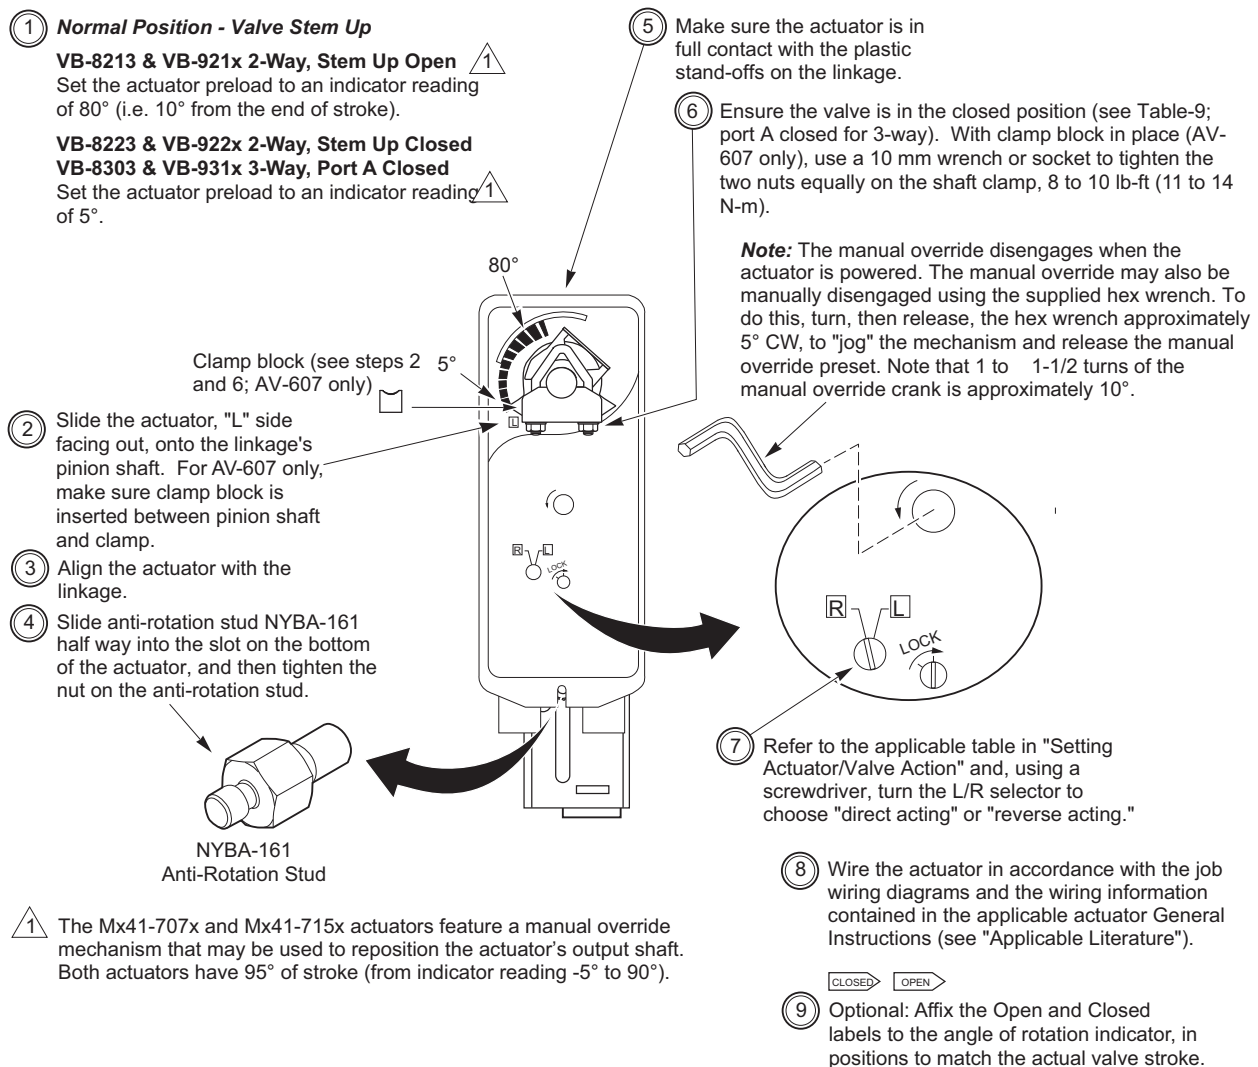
Mounting Mx41-707x or Mx41-715x and Setting Up Actuator/Linkage/Valve Assembly.
